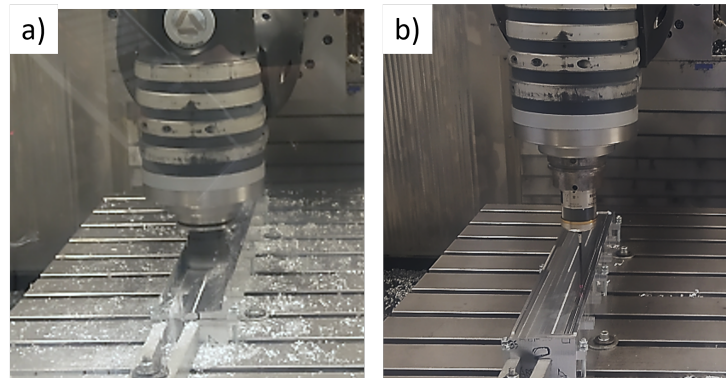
Reduced on-machine LR in Setup 1, open pocket side: a) machining of a layer 'j'; b) probing.
